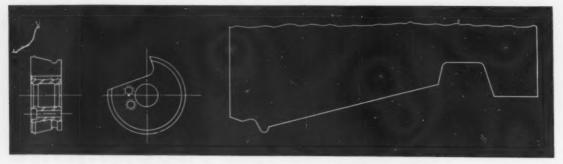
The profile of this circular shaving tool (shown enlarged at right) is produced by plunge grinding with a crush-trued wheel.
